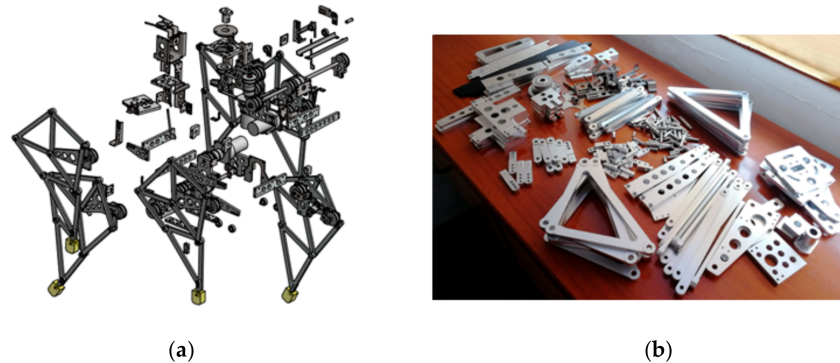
(a) Assembly drawing. (b) Mechanical components.
